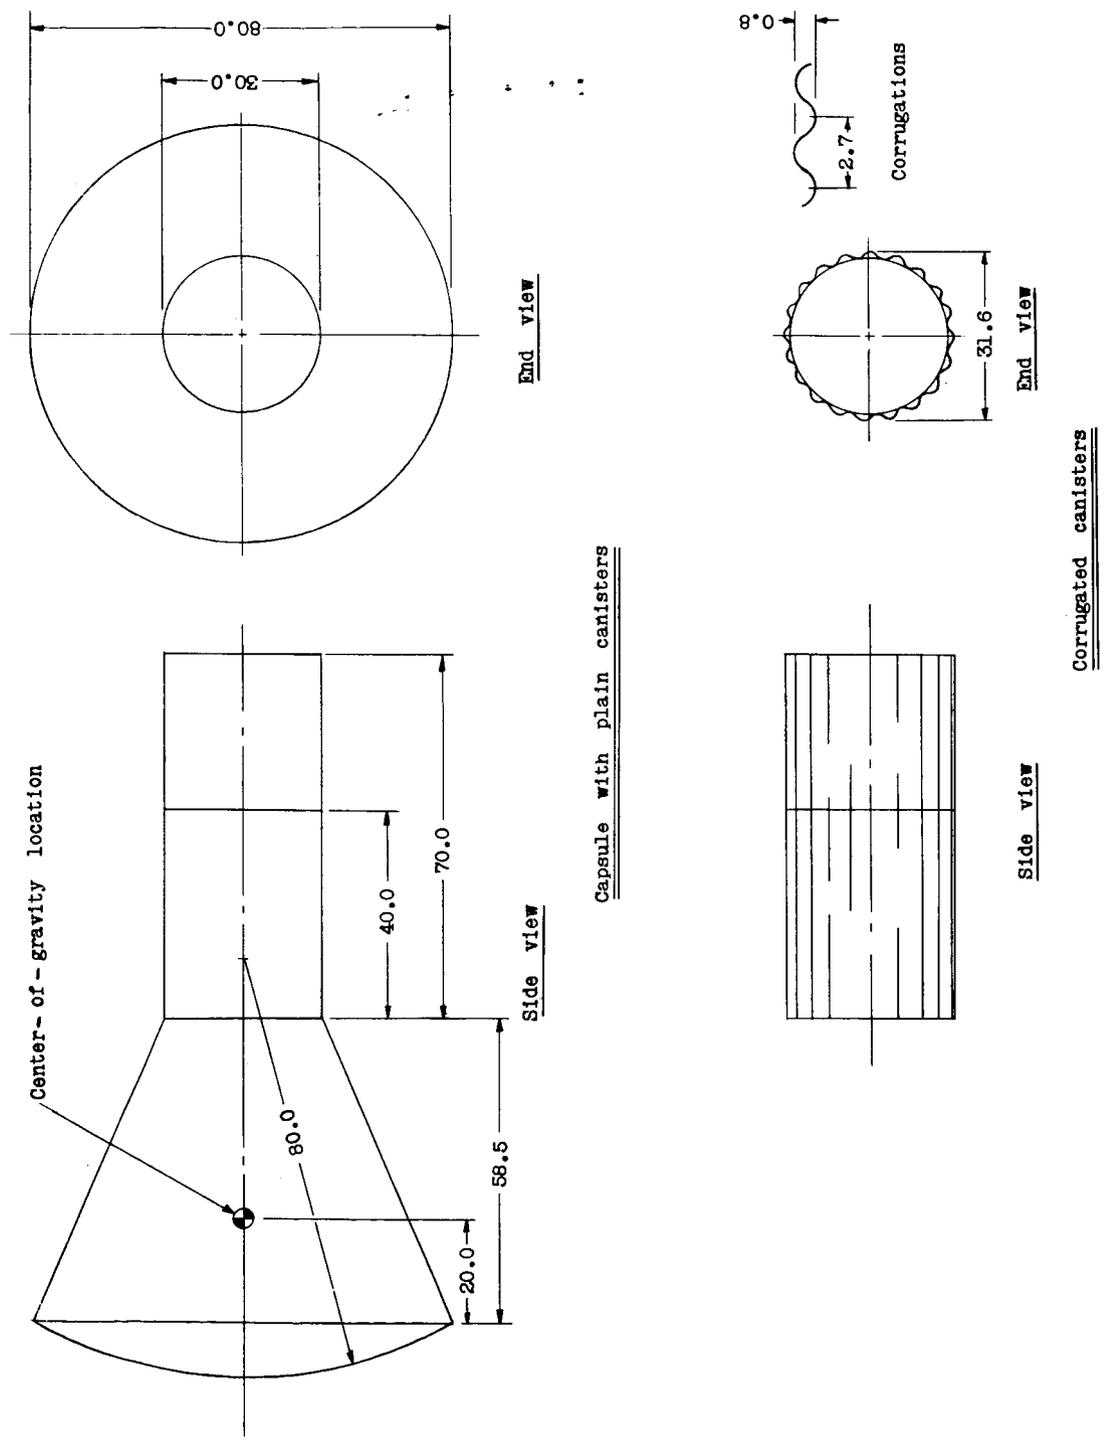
Two-view drawing of the capsule model. All dimensions are in inches.
